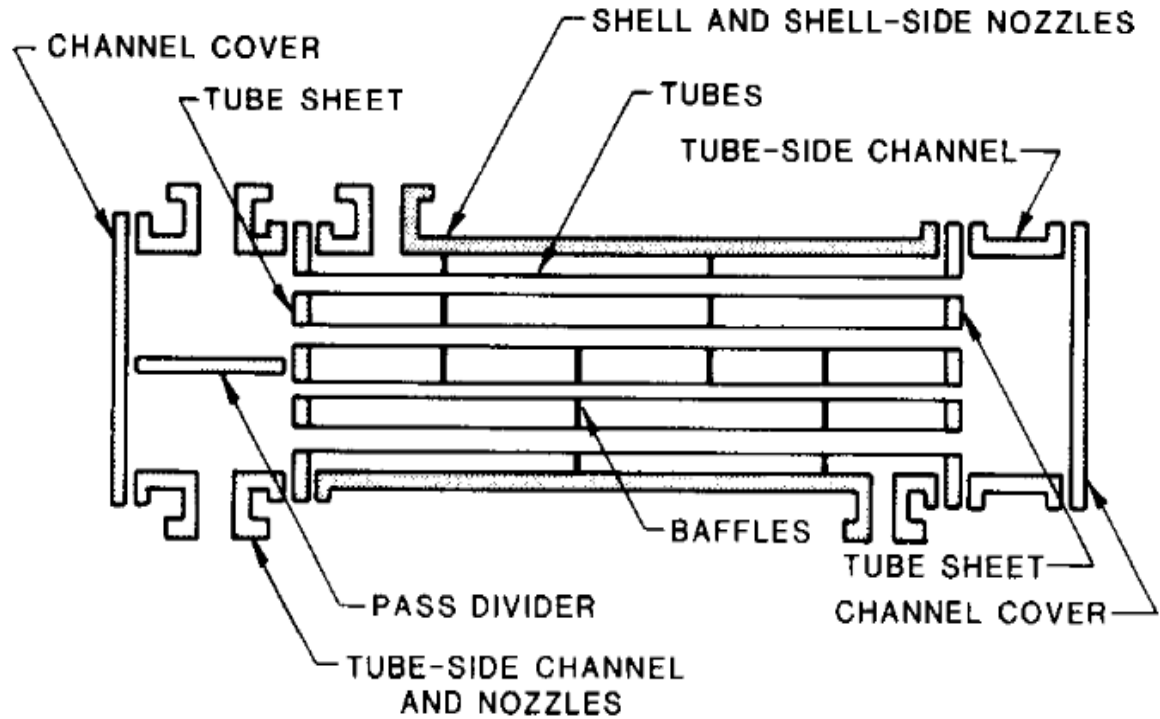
a standard (fixed-tubesheet) shell-and-tube type heat exchanger is illustrated[46].
